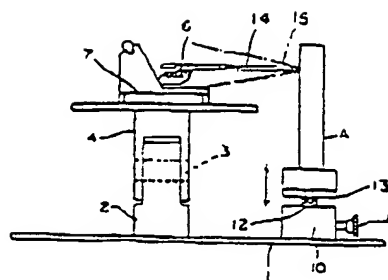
through 6 are a side view, front view and top view of the dental impression attachment tool when attached,
